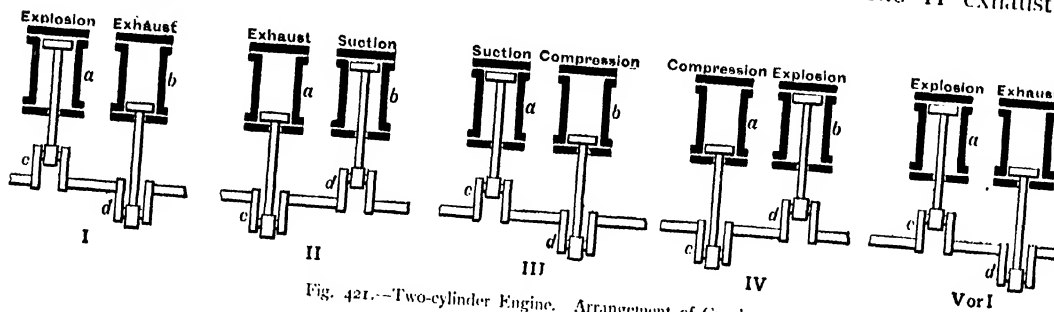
Two-cylinder Engine. Arrangement of Cranks
